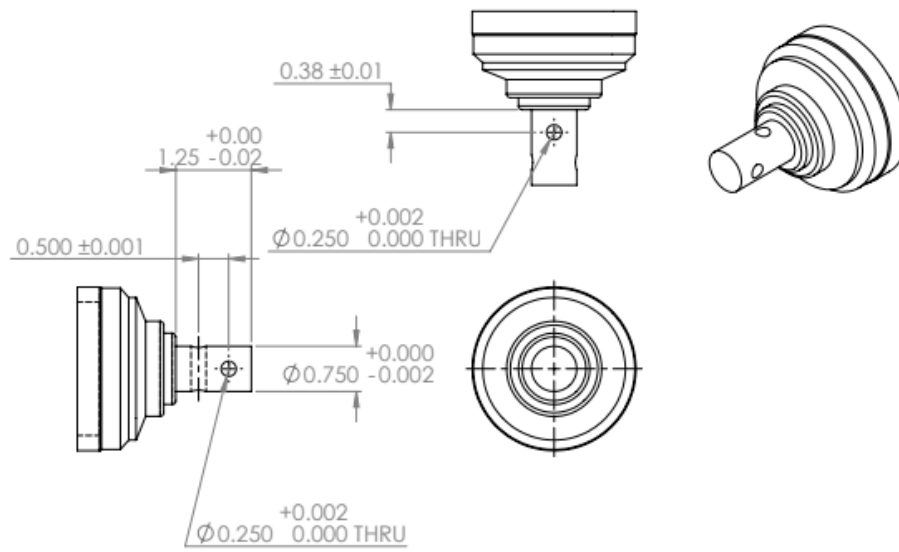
Drawings of necessary modifications to the Rzeppa joint. With these dimensions the joint would slide into and connect to the jack shafts with two cross bolts.
